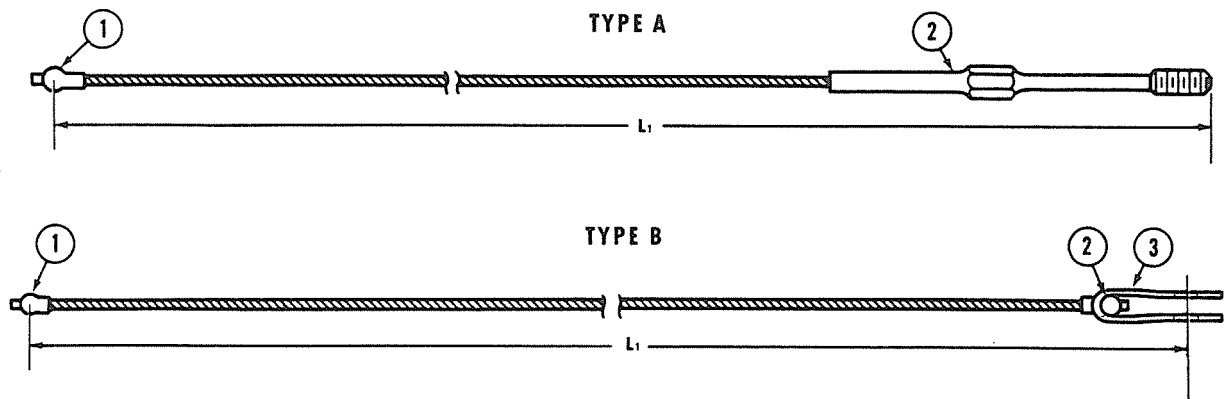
(Sheet 4 of 5 Sheets). Automatic Pilot Control System – Cable Chart and Cable Assemblies
